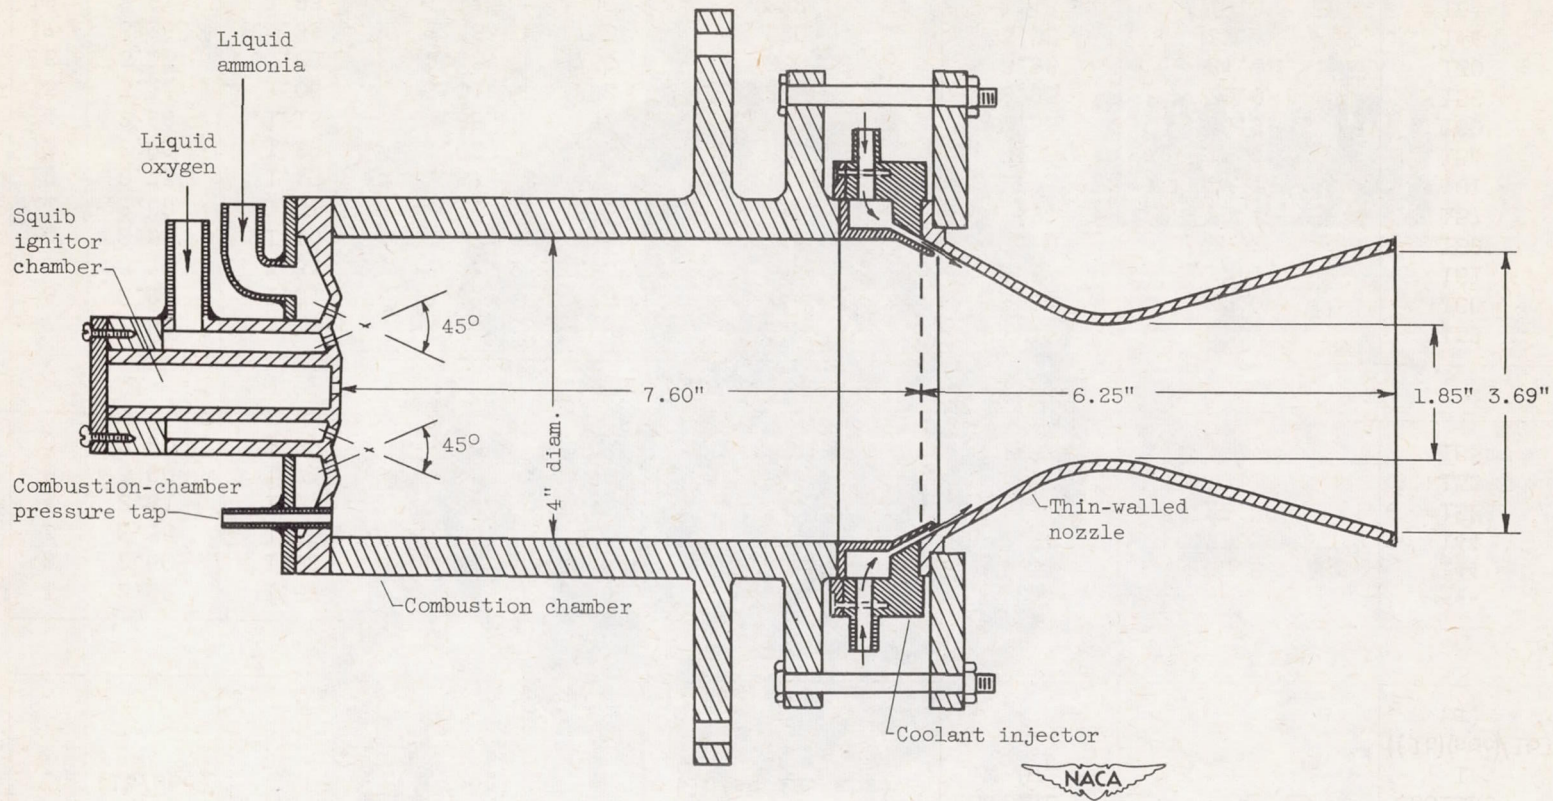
Rocket engine used for investigation of nozzle film cooling.
